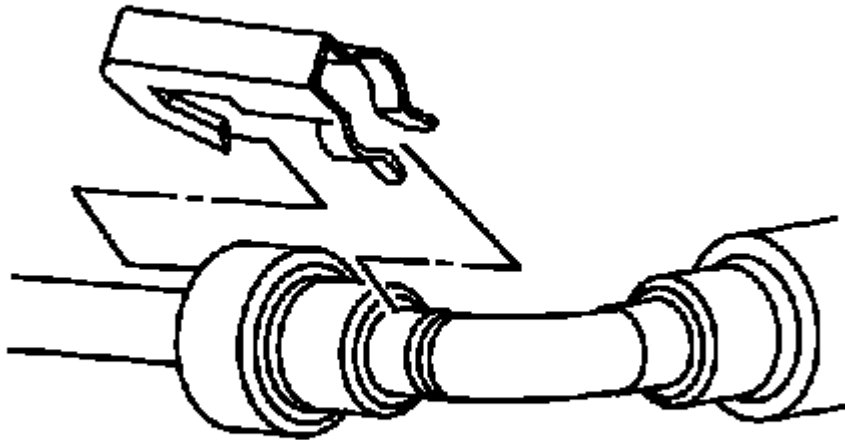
View Of Quick-Connect Fitting Retainer (Metal Collar)
